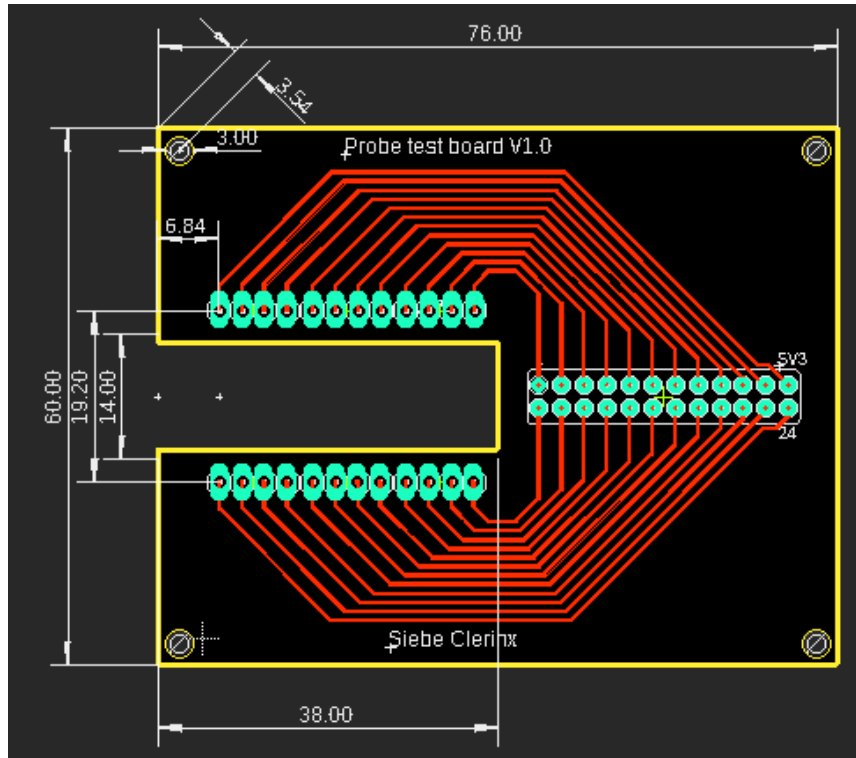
PCB board view for surface resistivity measurements (also Surface PCB)
